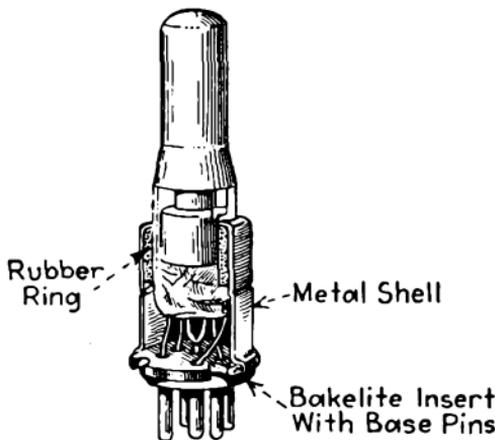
Method of attaching to the tube the base of Catkin metal vacuum tube.
